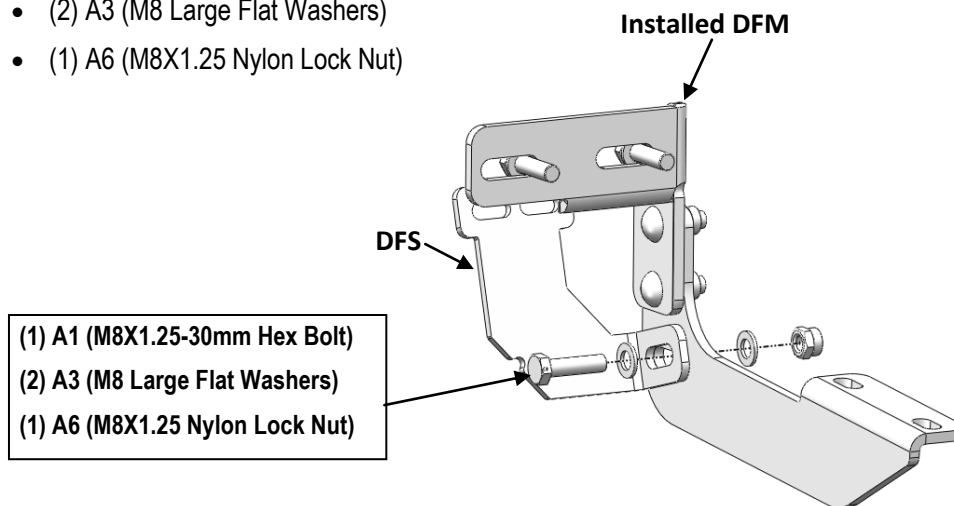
Driver Front Mounting Bracket Installation (For Models With Factory Threaded Inserts)
